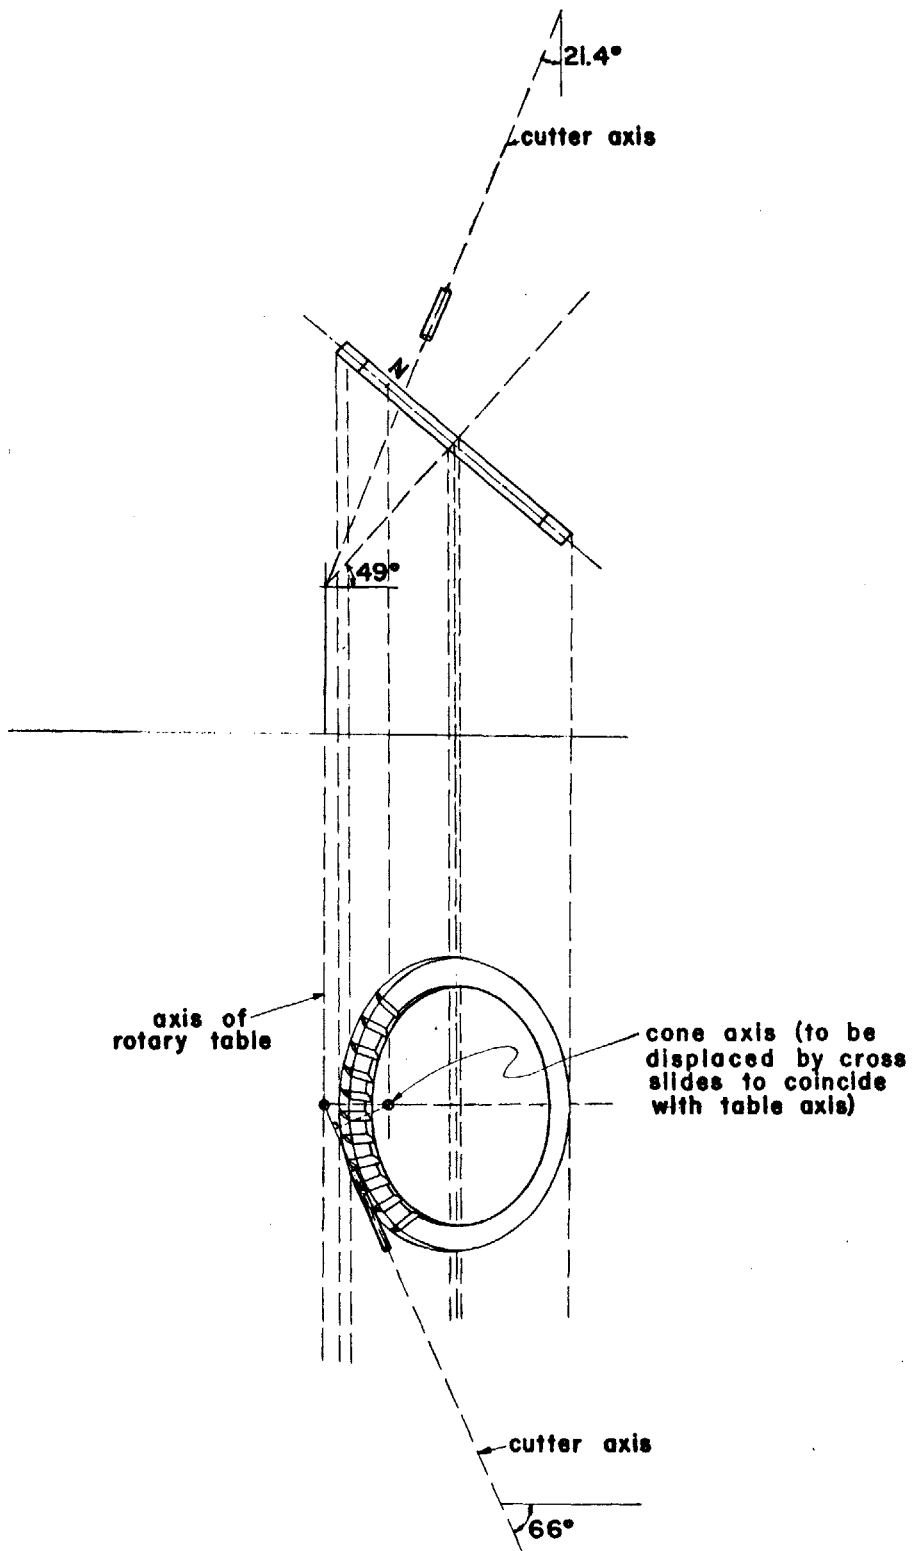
SCHEMATIC OF ROTOR CONSTRUCTION SET UP - SHOWING OFFSETS
